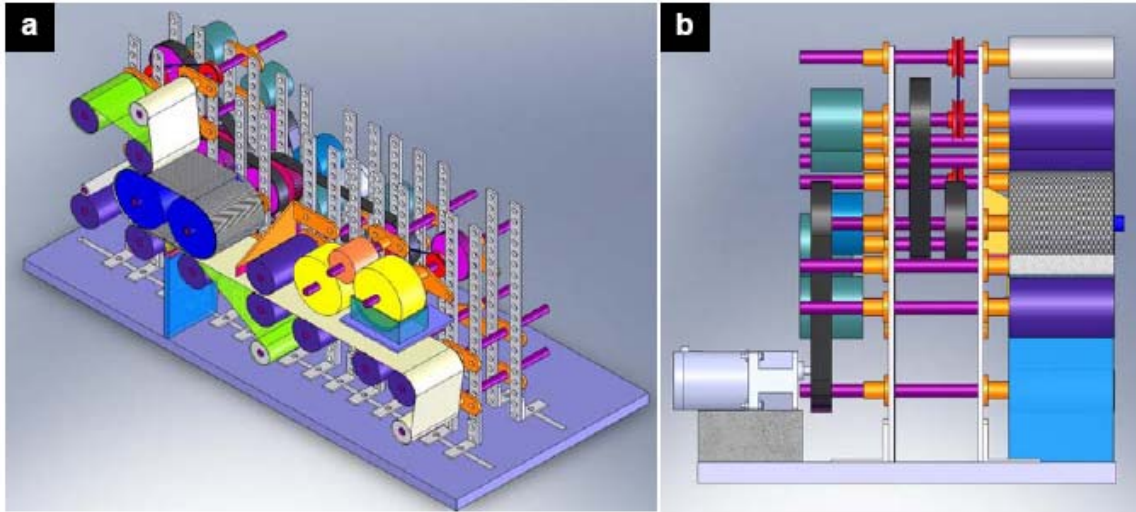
Prototype design of R2R/R2P NIL (Model II) which enables 6” wide patterning. (a) Side view (b) Front view
